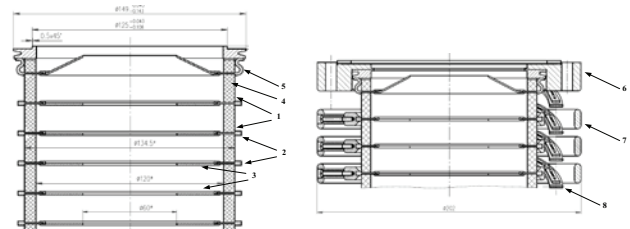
Schematic drawing of the part of the accelerating tube. 1 - ceramics, 2 – titanium rings, 3 – stainless steel electrodes, 4 – ceramic compensator, 5 – stainless steel ending for welding. 6 – flange DN160CF, 8 – divider (chain of HV resistors), 7 – stainless outer rings.
